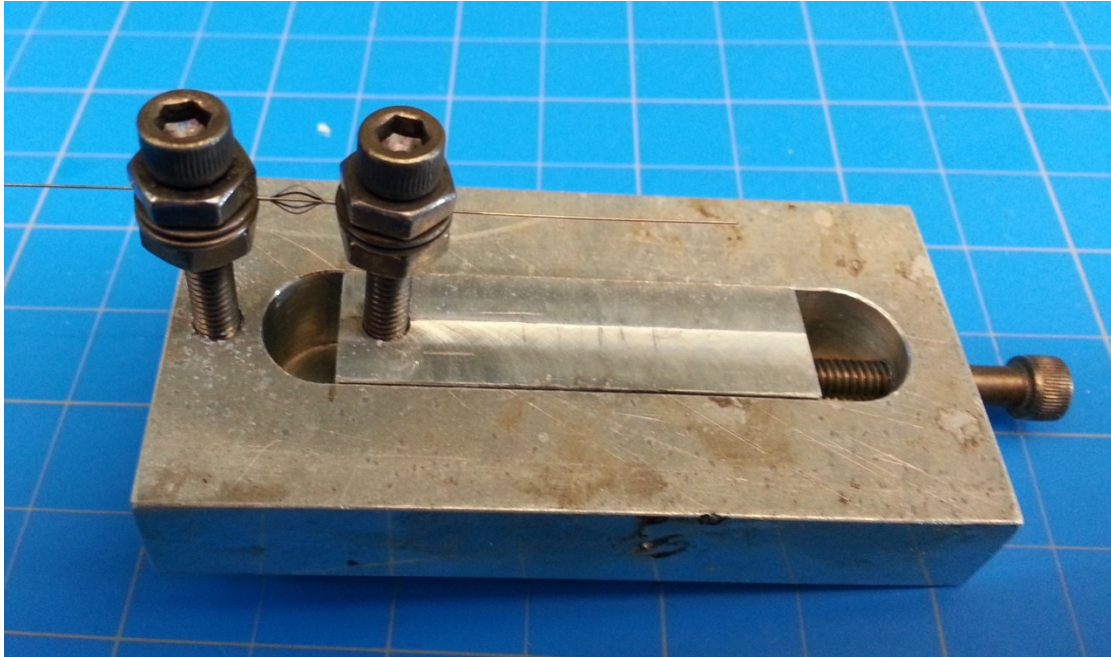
Aluminum fixture for SNF shape setting. The set screw on the right is utilized to move the center piece for the gradual and controlled compression of the SNF between two washers. Once the desired deformation is achieved, the fixture is placed in a furnace at 550 °C for 7 minutes.
